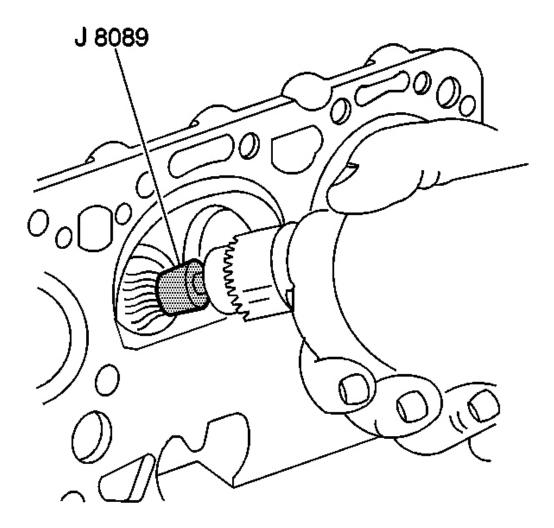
Removing Carbon From Combustion Chambers Courtesy of GENERAL MOTORS CORP.
